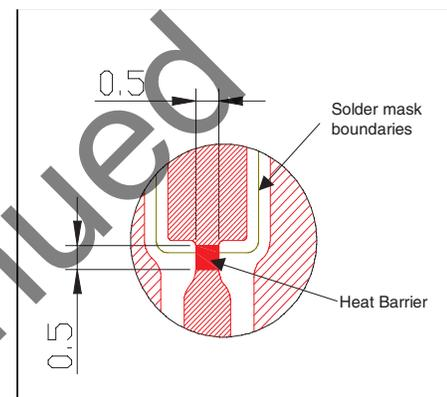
Creating a Heat Barrier for Hot-Bar Soldering.
